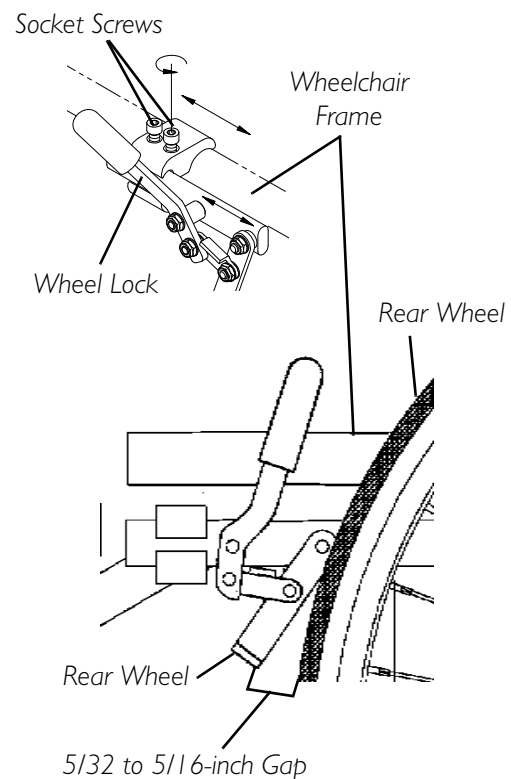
USING HIGH MOUNT WHEEL LOCKS
